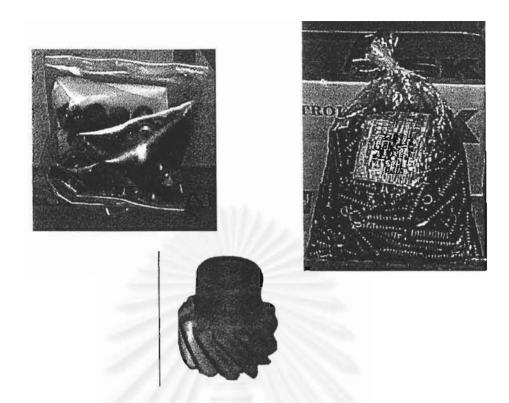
Oil pump, pinion gear, spring seats, and springs
